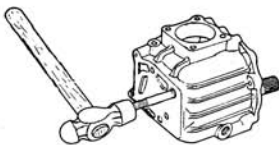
Using a bolt or other soft punch, drive intermediate shaft assembly out of case.
